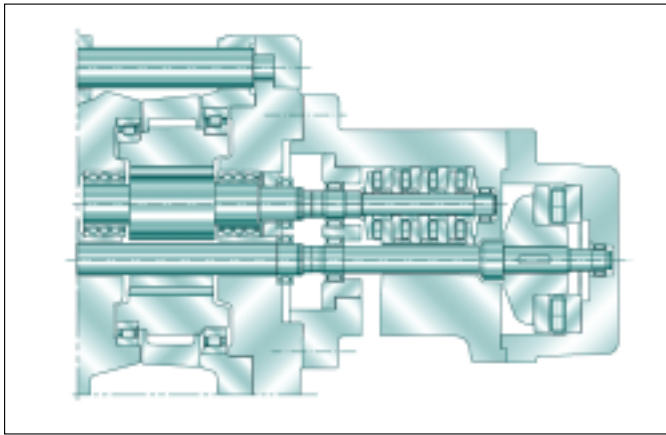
Distribution gear in a twin screw extruder with combination bearing consisting of tandem bearing and thrust cylindrical roller bearing
